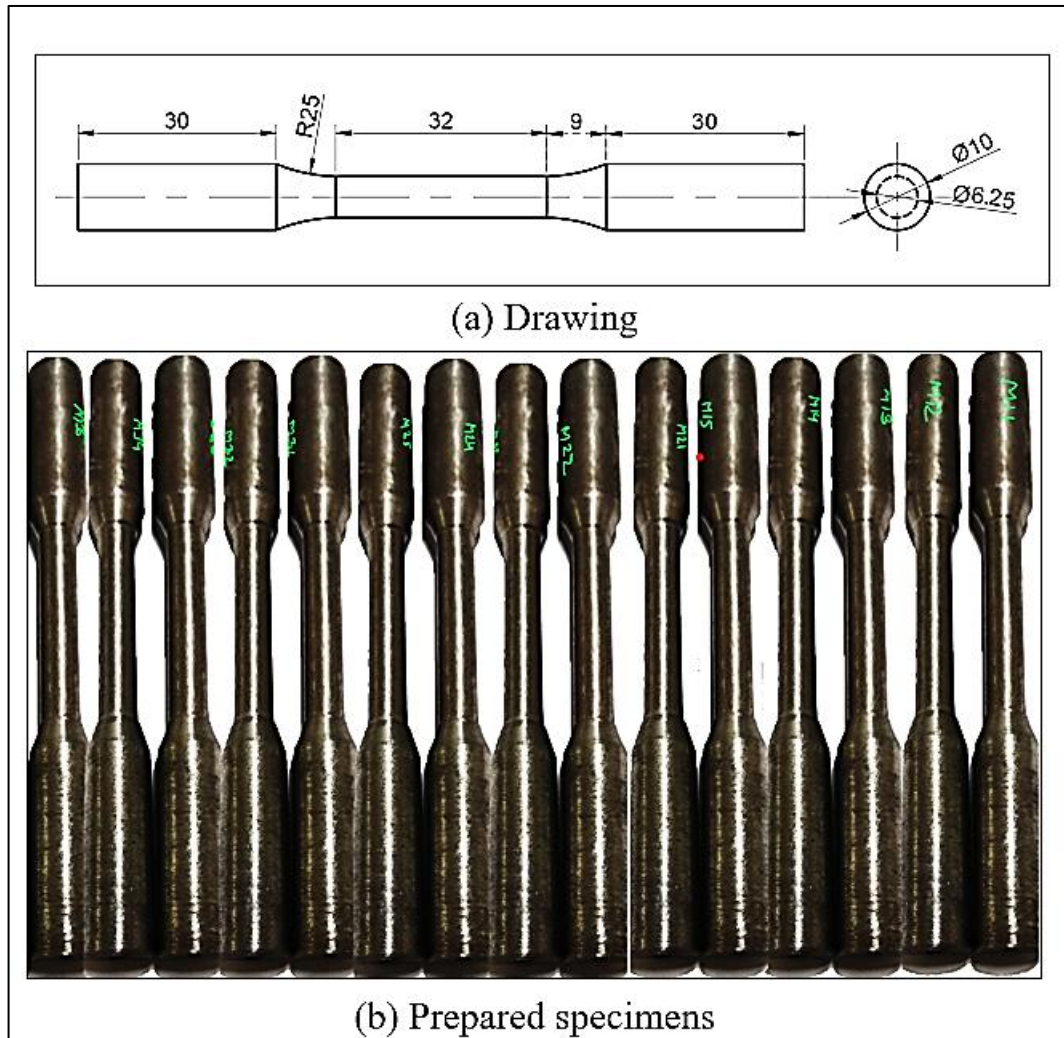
Tensile test specimens (all dimensions in mm)
